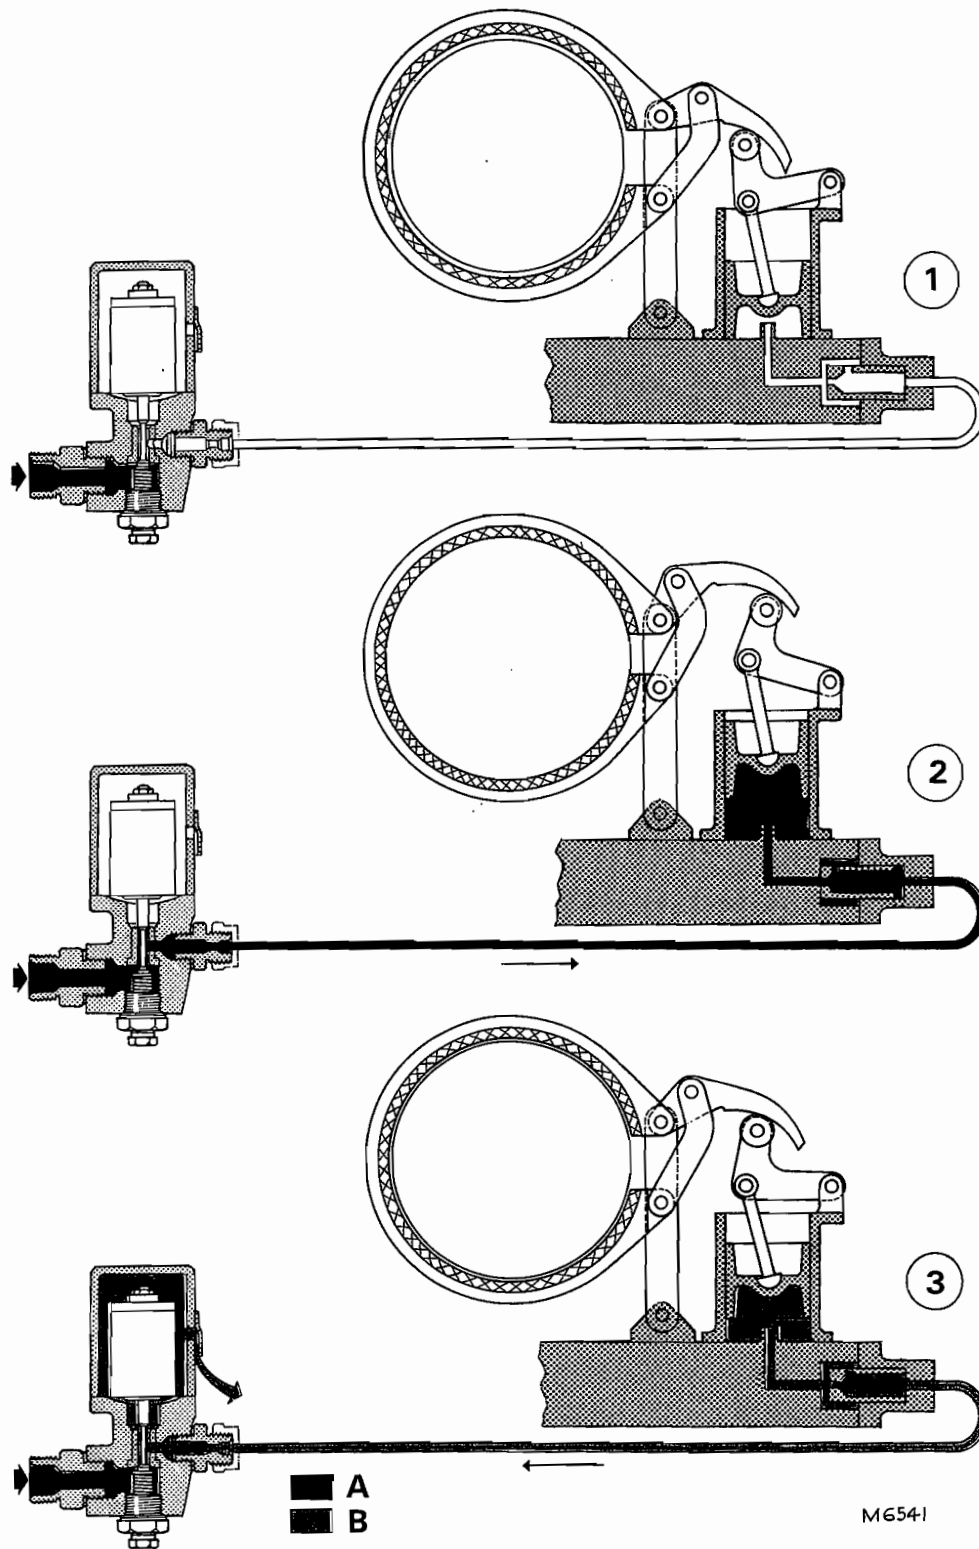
DIAGRAMMATIC LAYOUT OF GEARBOX ELECTRO-PNEUMATIC CONTROL
